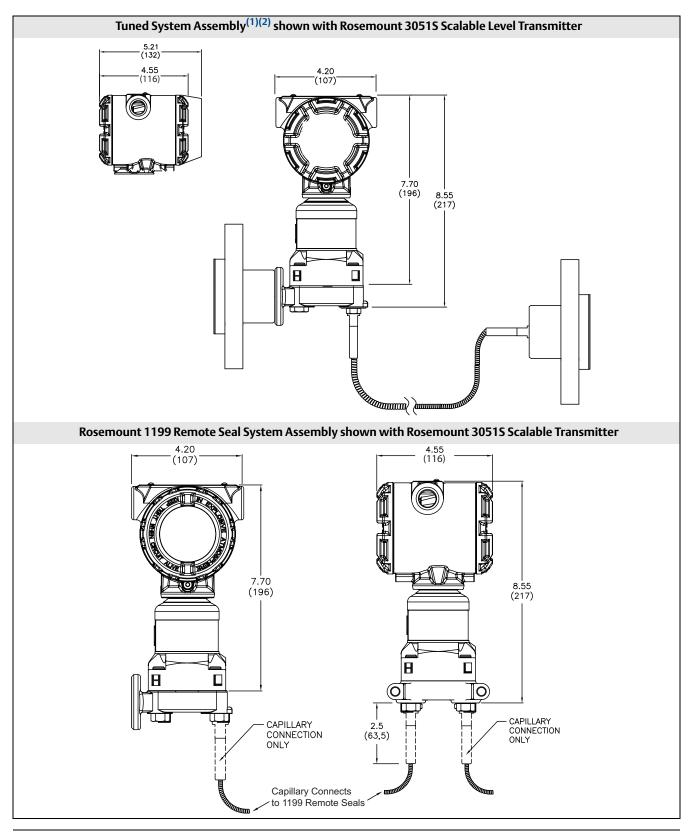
Tuned[™] System Assembly (Measurement in inches (millimeters))
